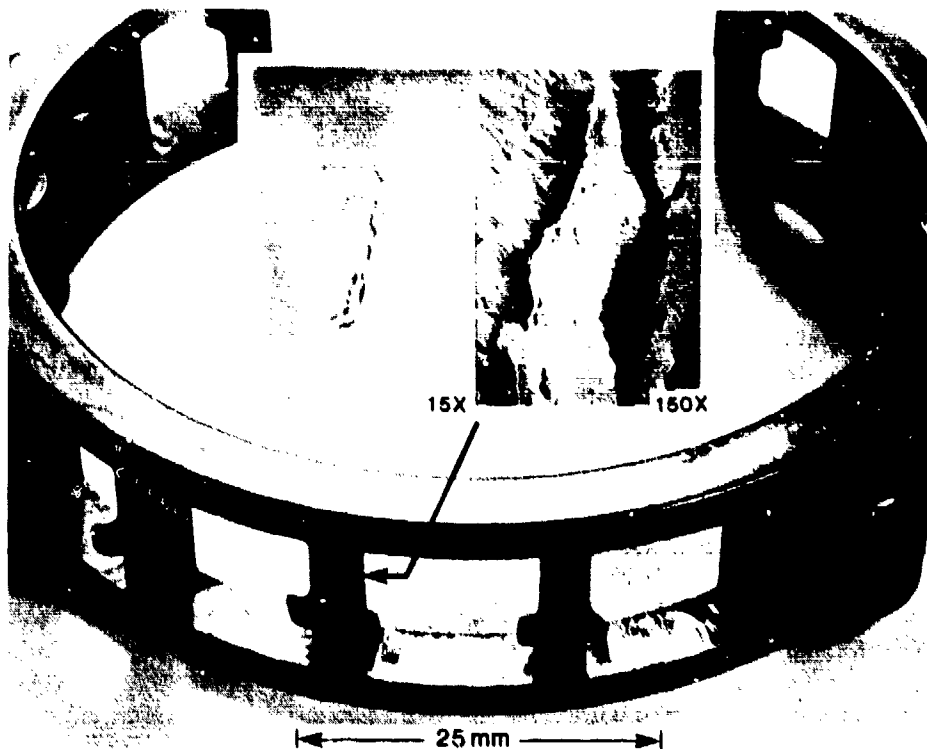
Circular Grooves in Cage Sidewall Caused by Contact With Ridged Roller End
